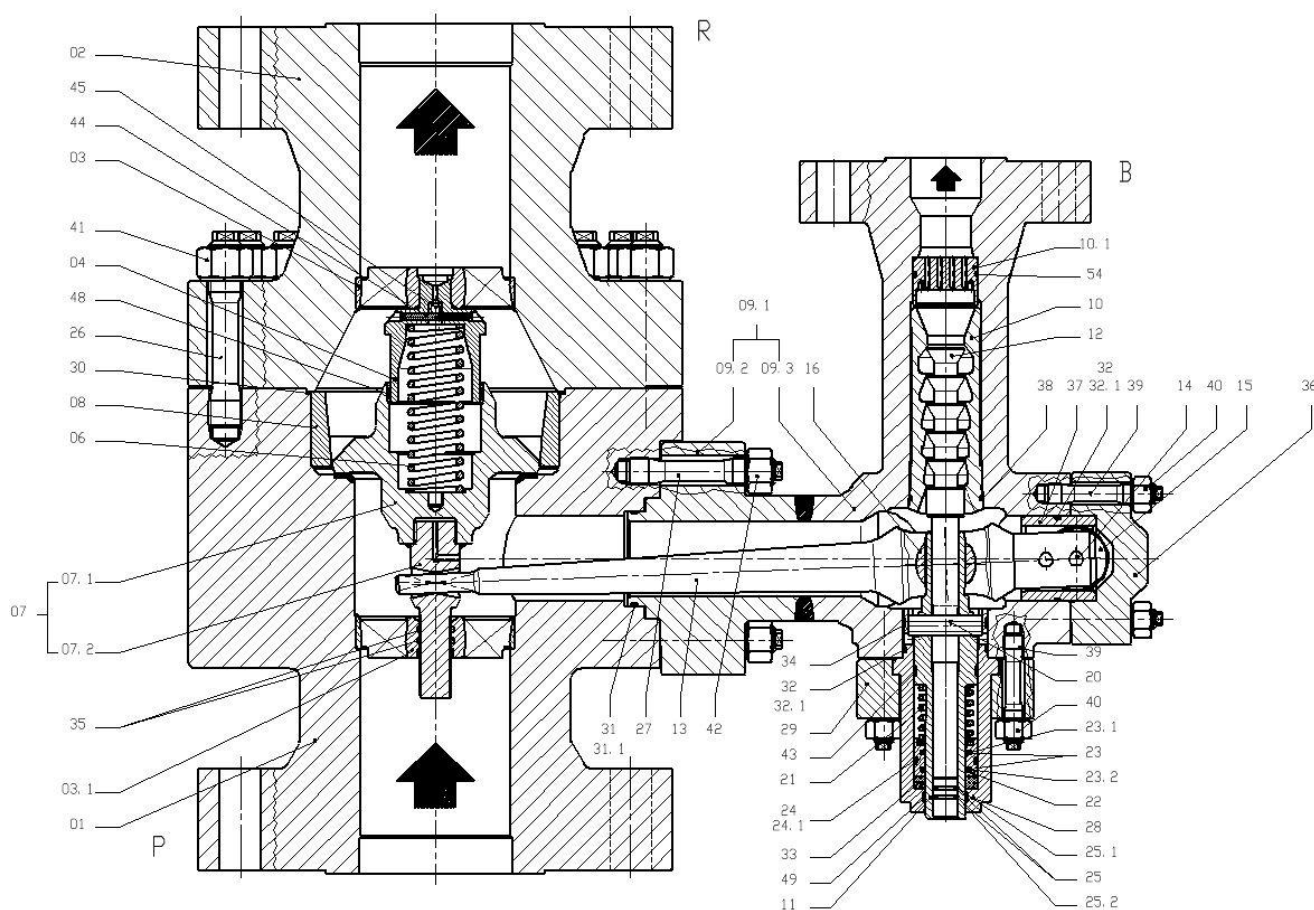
Sectional drawing and parts list of the valve type MRM (example)
